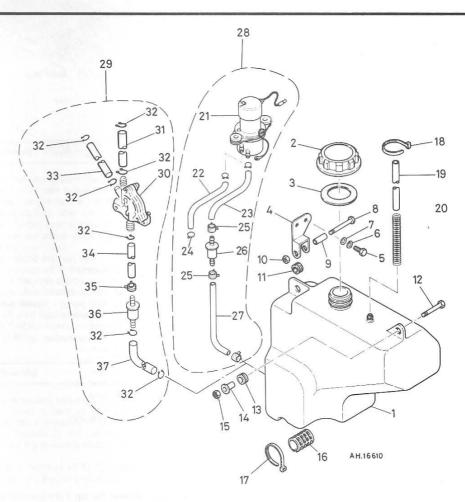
Fuel tank and pump - KLT200 (Sec 2)
